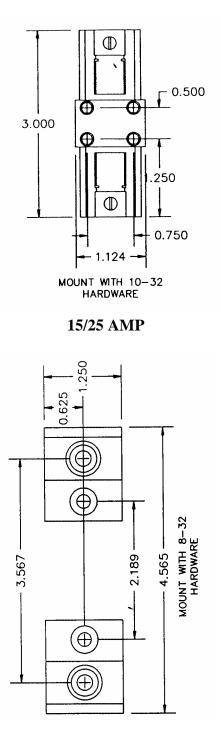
OUTLINE and MOUNTING DIMENSIONS ZF3 – 70A
